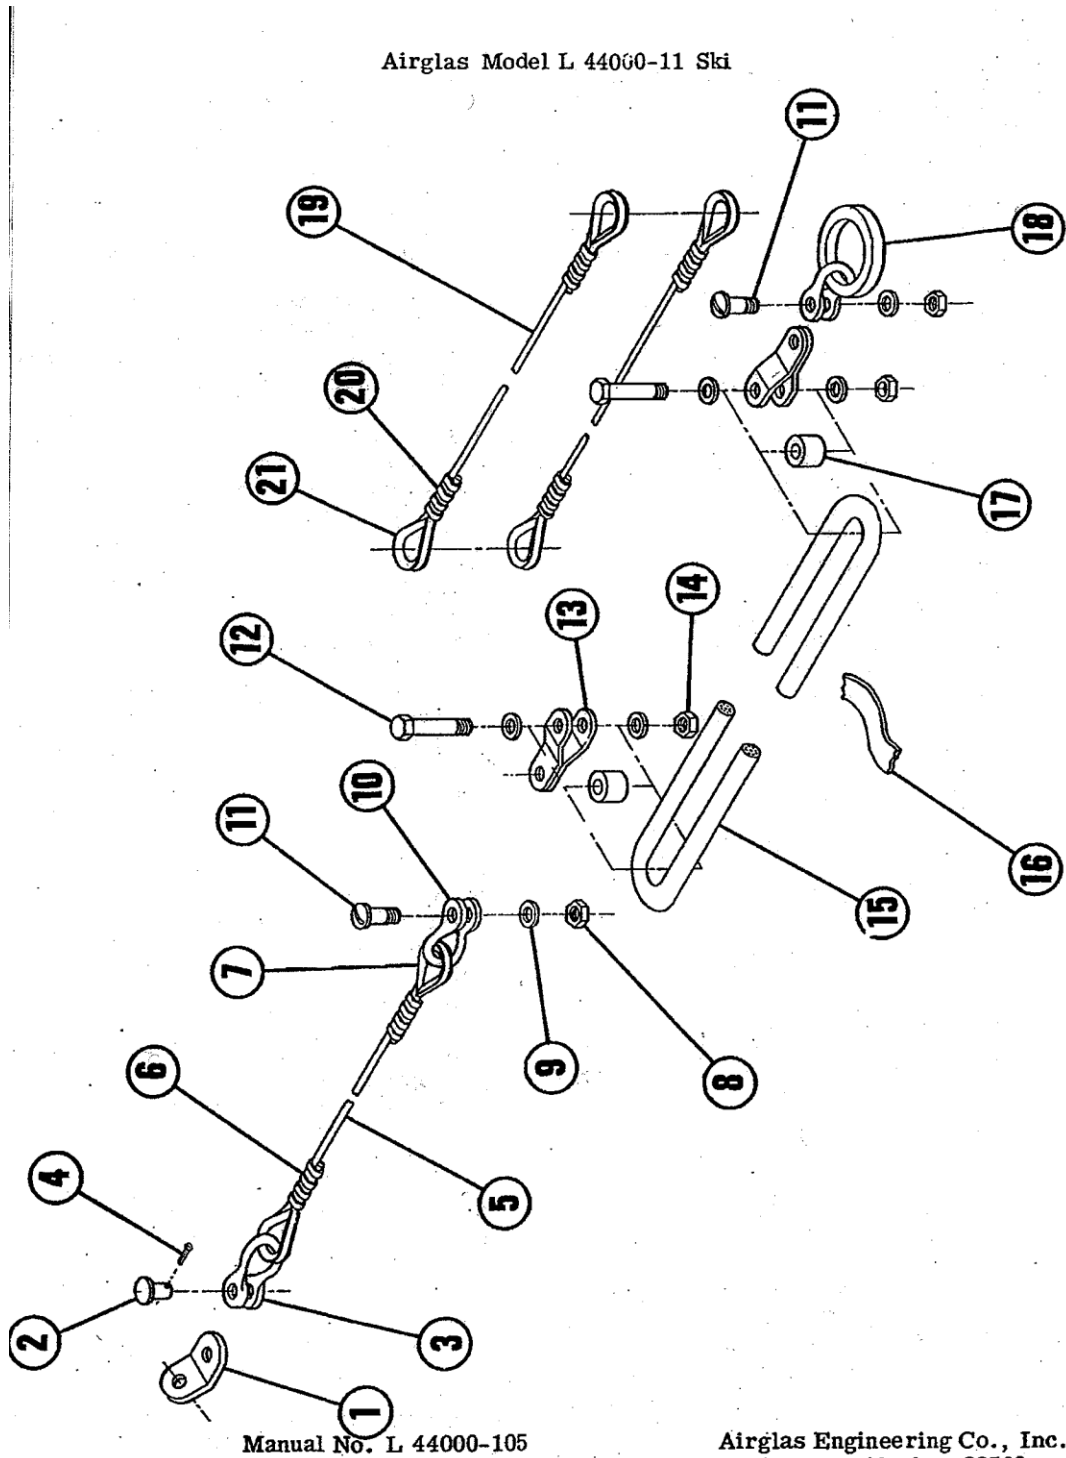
P/N L 44000-11-8 Safety Cable & Shock Ring Assy - Exploded View
